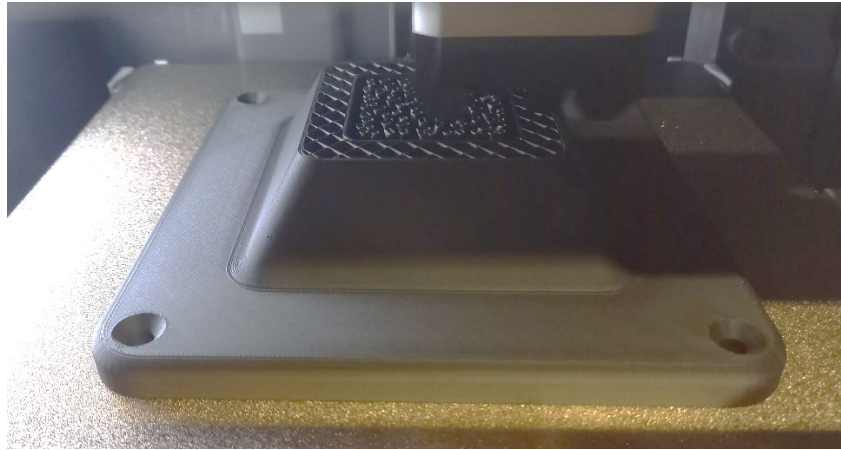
Printing mould No. 3 with 15% infill and honeycomb pattern.
